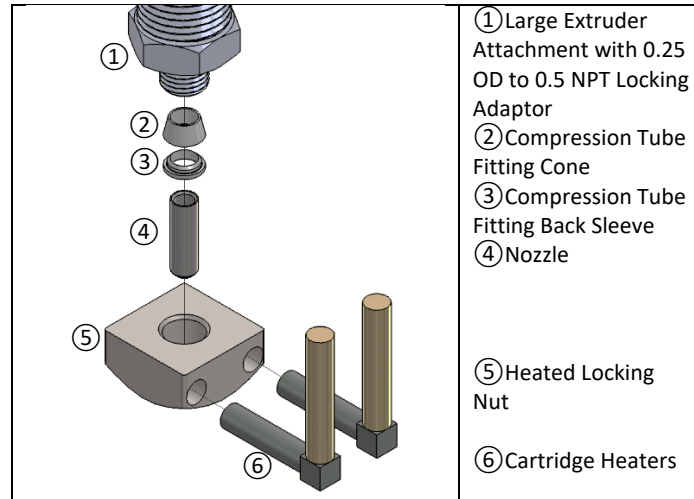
Exploded view of Small Nozzle Assembly. Note the configuration of the ferrules.
